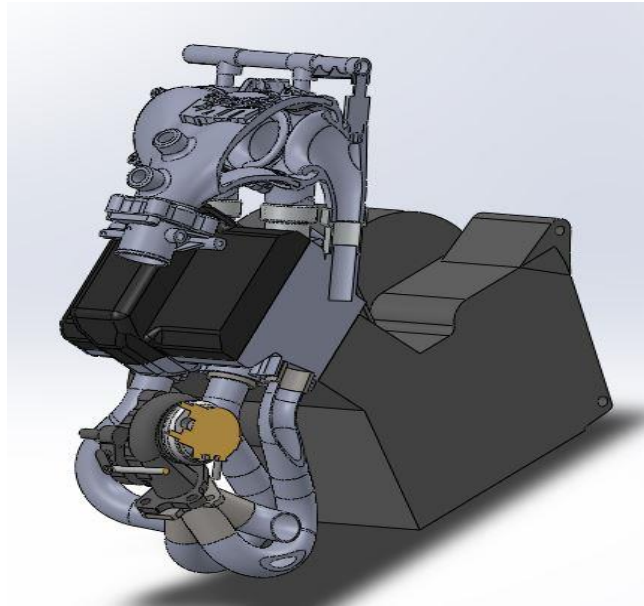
Cross section of the Intake Manifold mounted on to the Head
